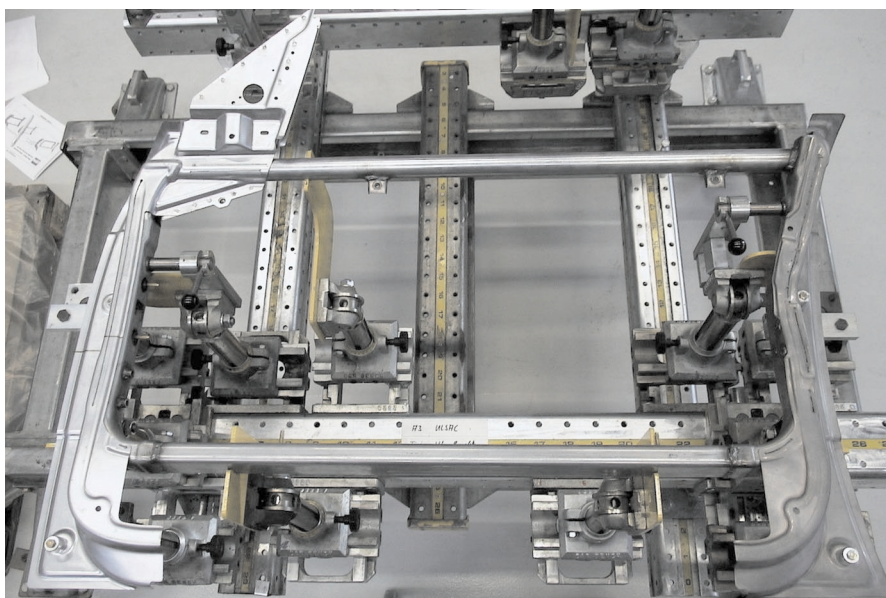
Subassembly #2: Front Door Inner Parts to Front Door Frame in Assembly fixture
